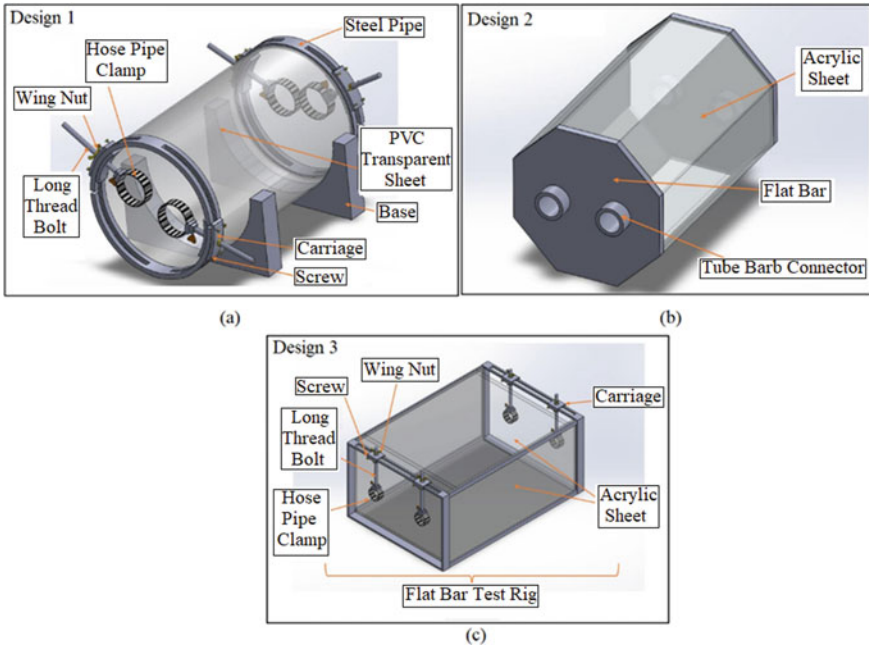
Three proposed test rig designs; a Design 1; b Design 2; and c Design 3
